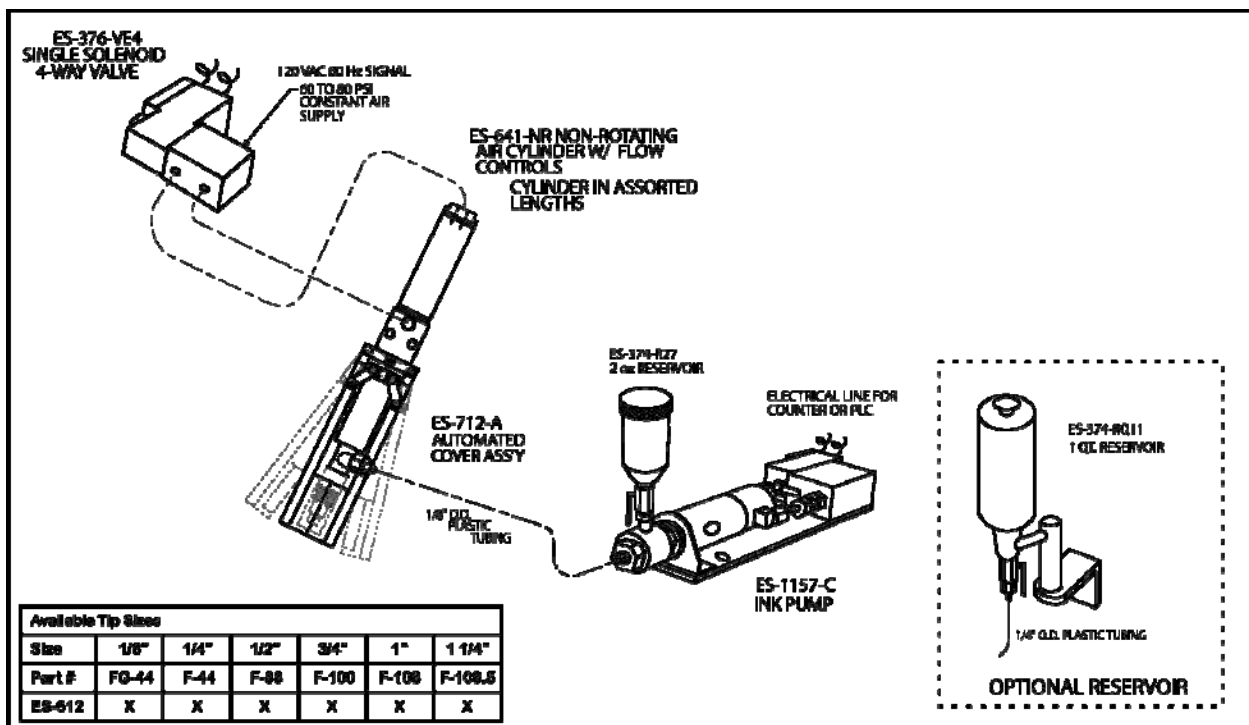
Carco ES-712-A Automated Spring Contact Marker
